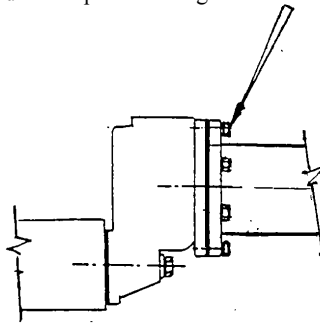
Gasket between Exhaust Pipe and Exhaust Manifold Flange
